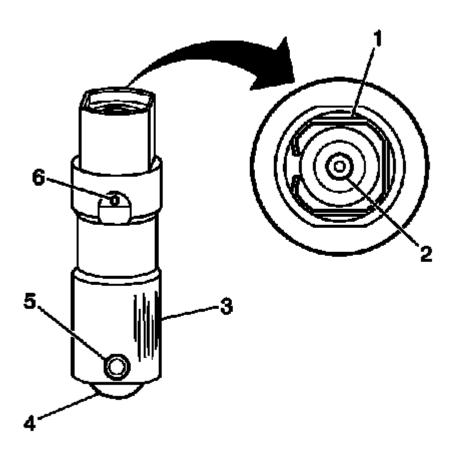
Inspecting Areas Of Valve Lifters Courtesy of GENERAL MOTORS CORP.
